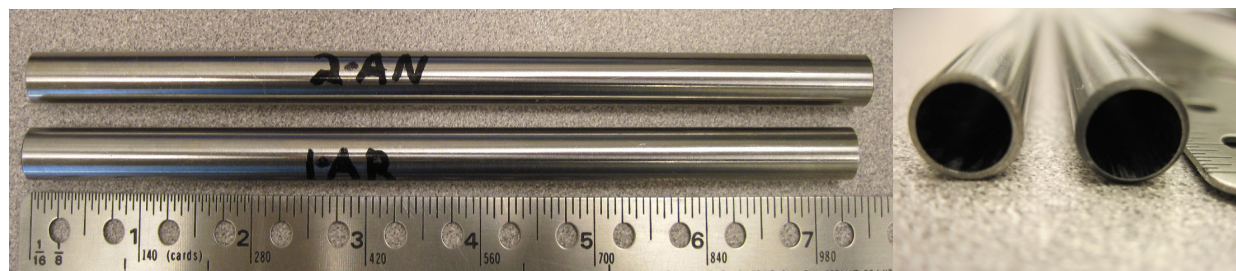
Extruded and finished MA-956 tubing ready for pilgering.
